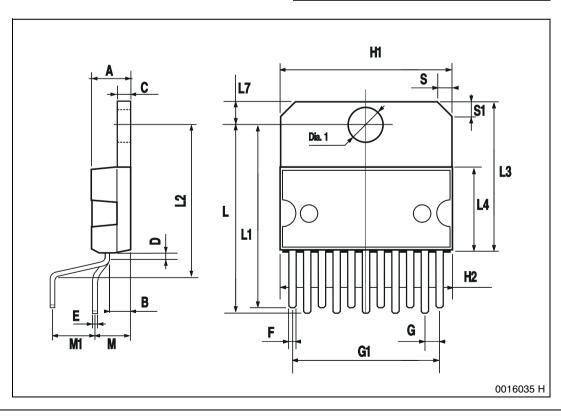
Multiwatt 11 Mechanical Data & Package Dimensions
